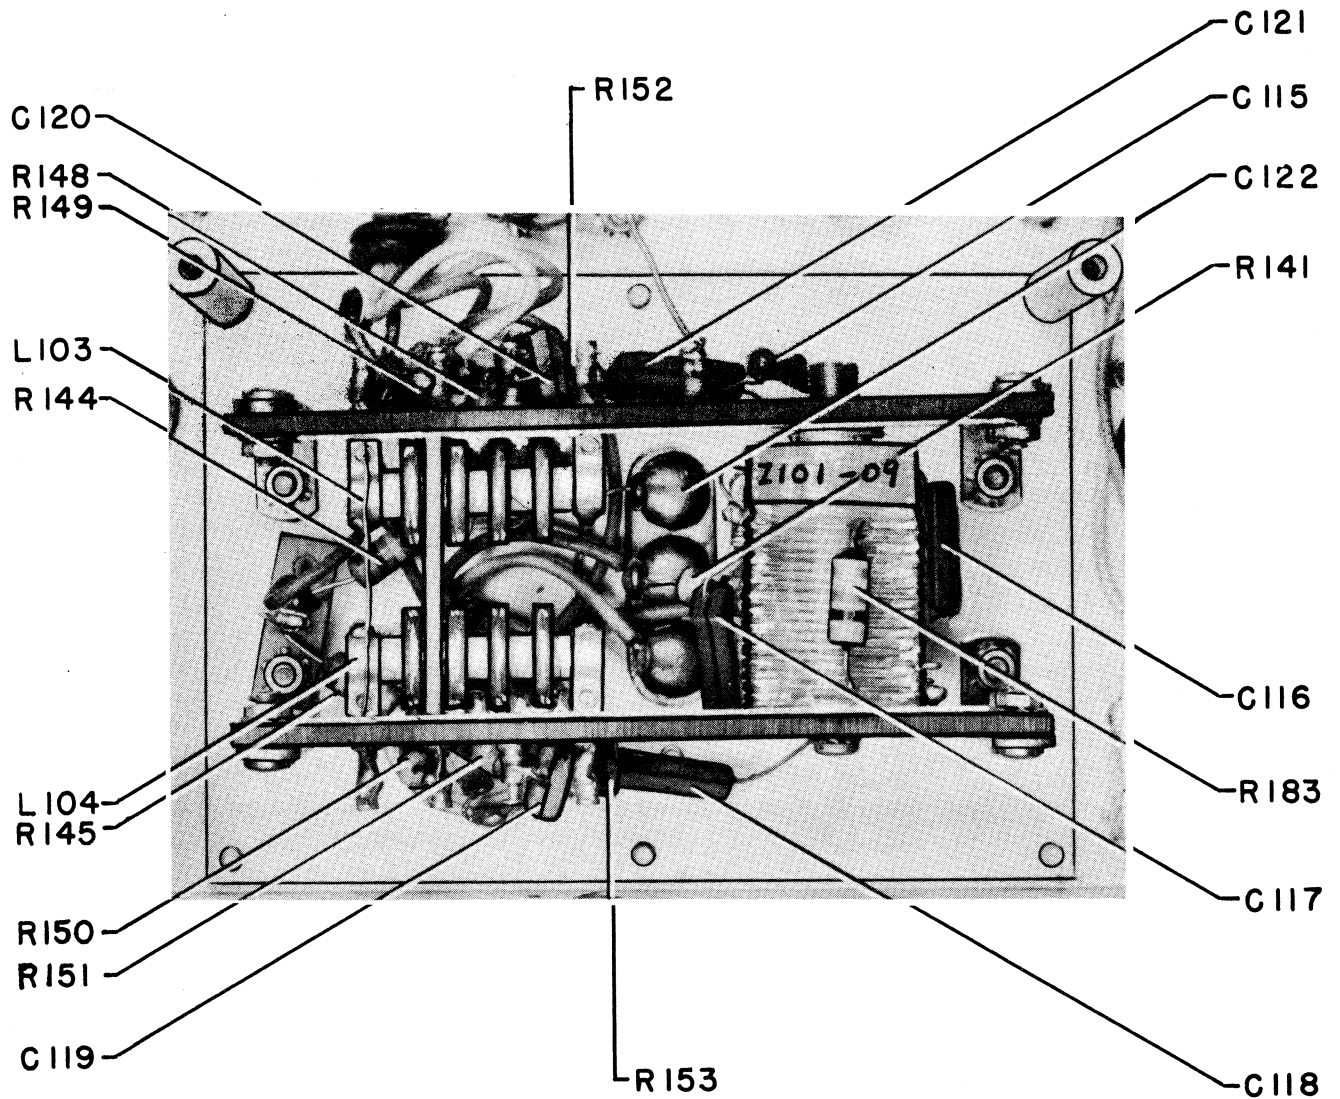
Navy Model RDP, Bottom View of FM Oscillator and Reactor Chassis.
